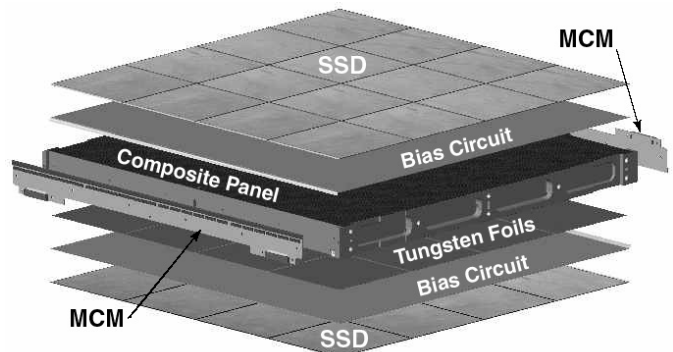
Exploded view of a tray assembly from the middle of a tower module (the top and bottom trays have SSDs on only a single side, and the lowest three trays have no tungsten).
